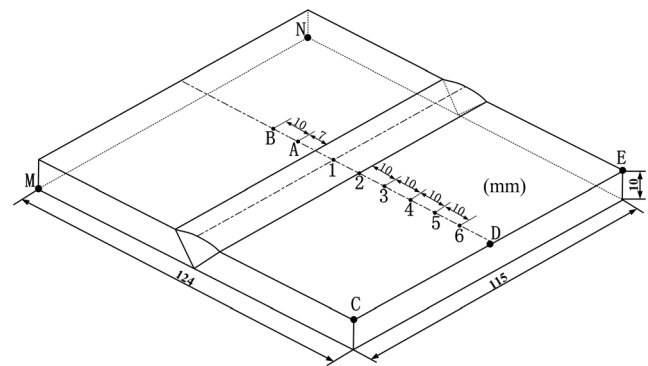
Schematic of the welded plate indicating locations where experimental measurements were taken and constraints imposed
